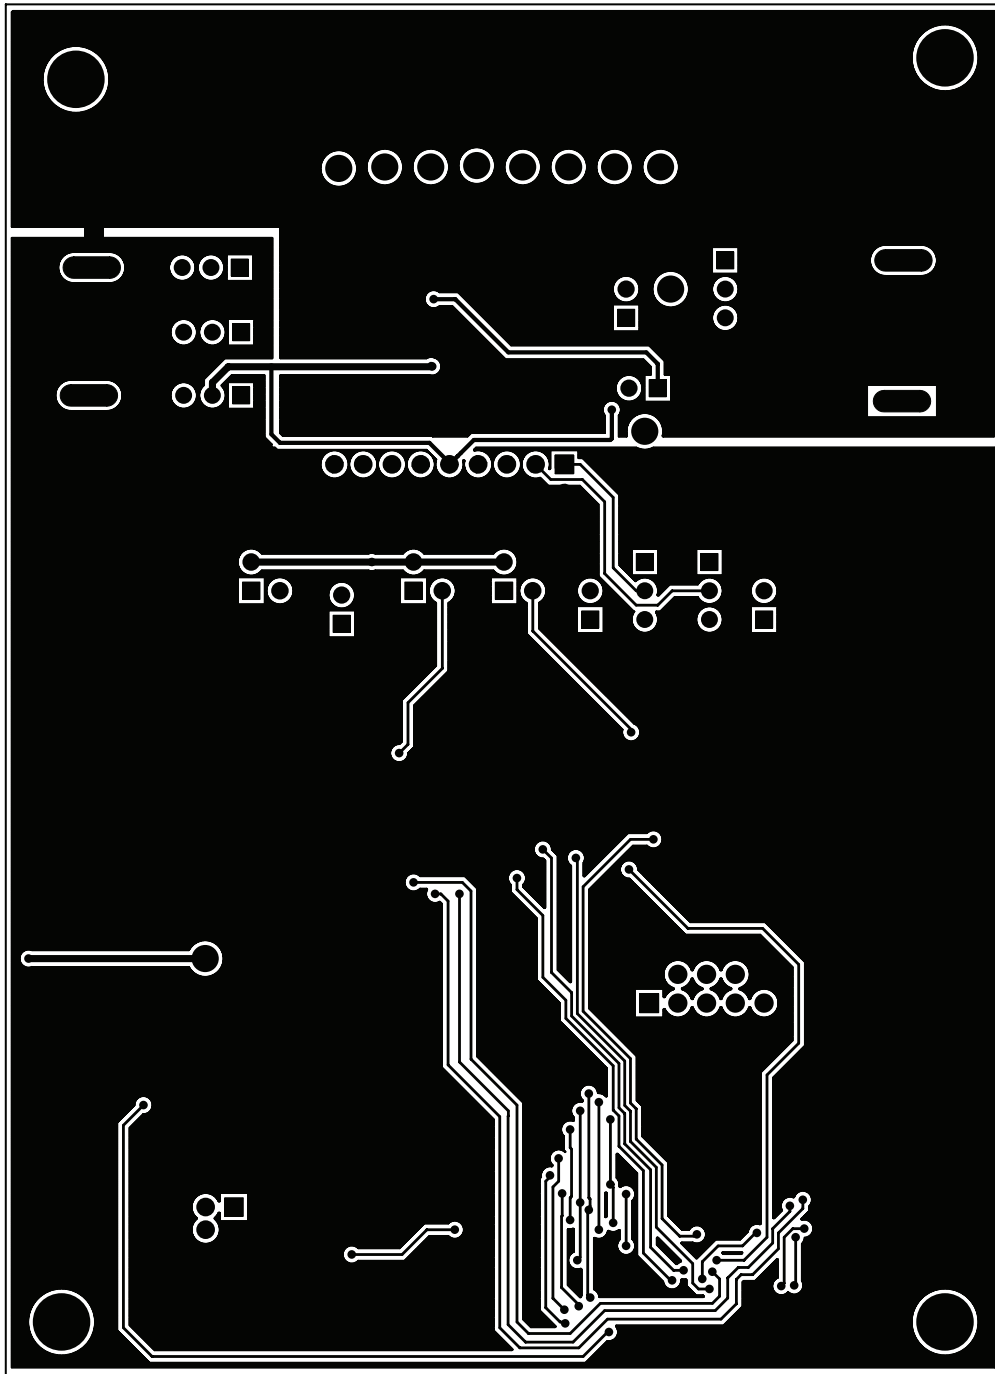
MAX5825A EV Kit PCB Layout—Solder Side
